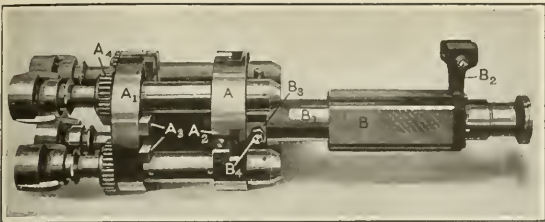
View showing Spindle Carrier and Turret Slide removed from Machine
